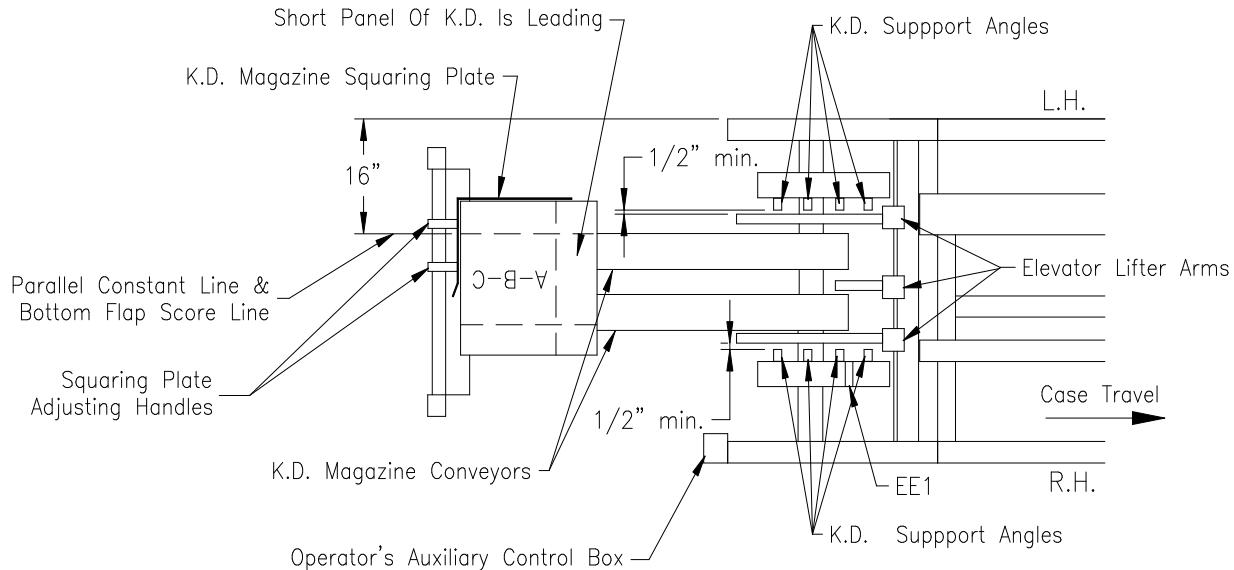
ADJUSTING ELEVATOR LIFTER ARMS
